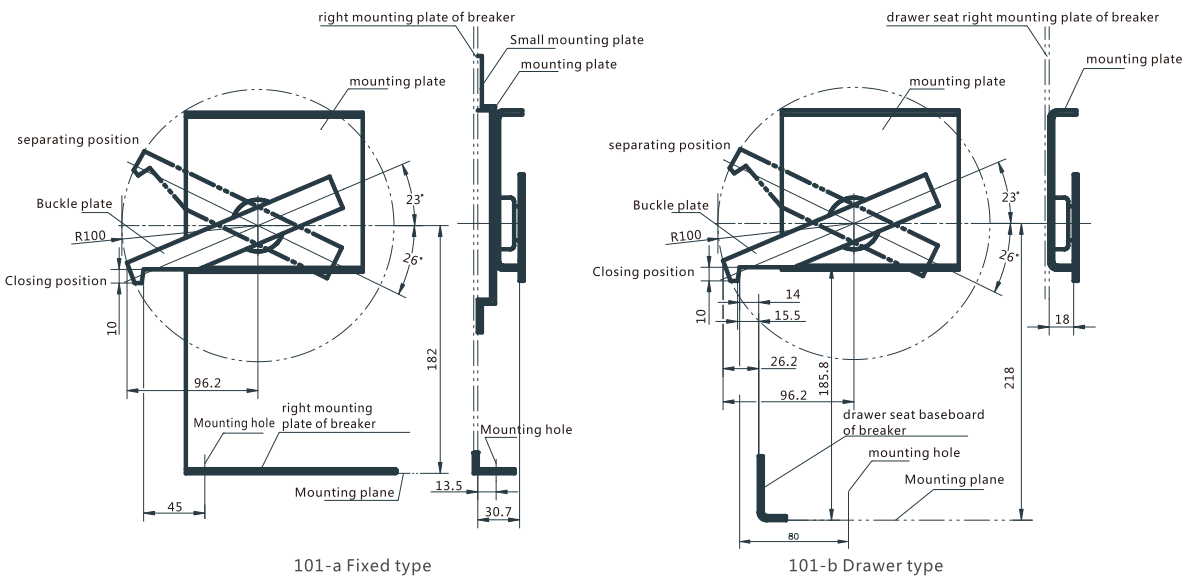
Installation dimension drawing of NXA20-63 air circuit breaker status door interlock
